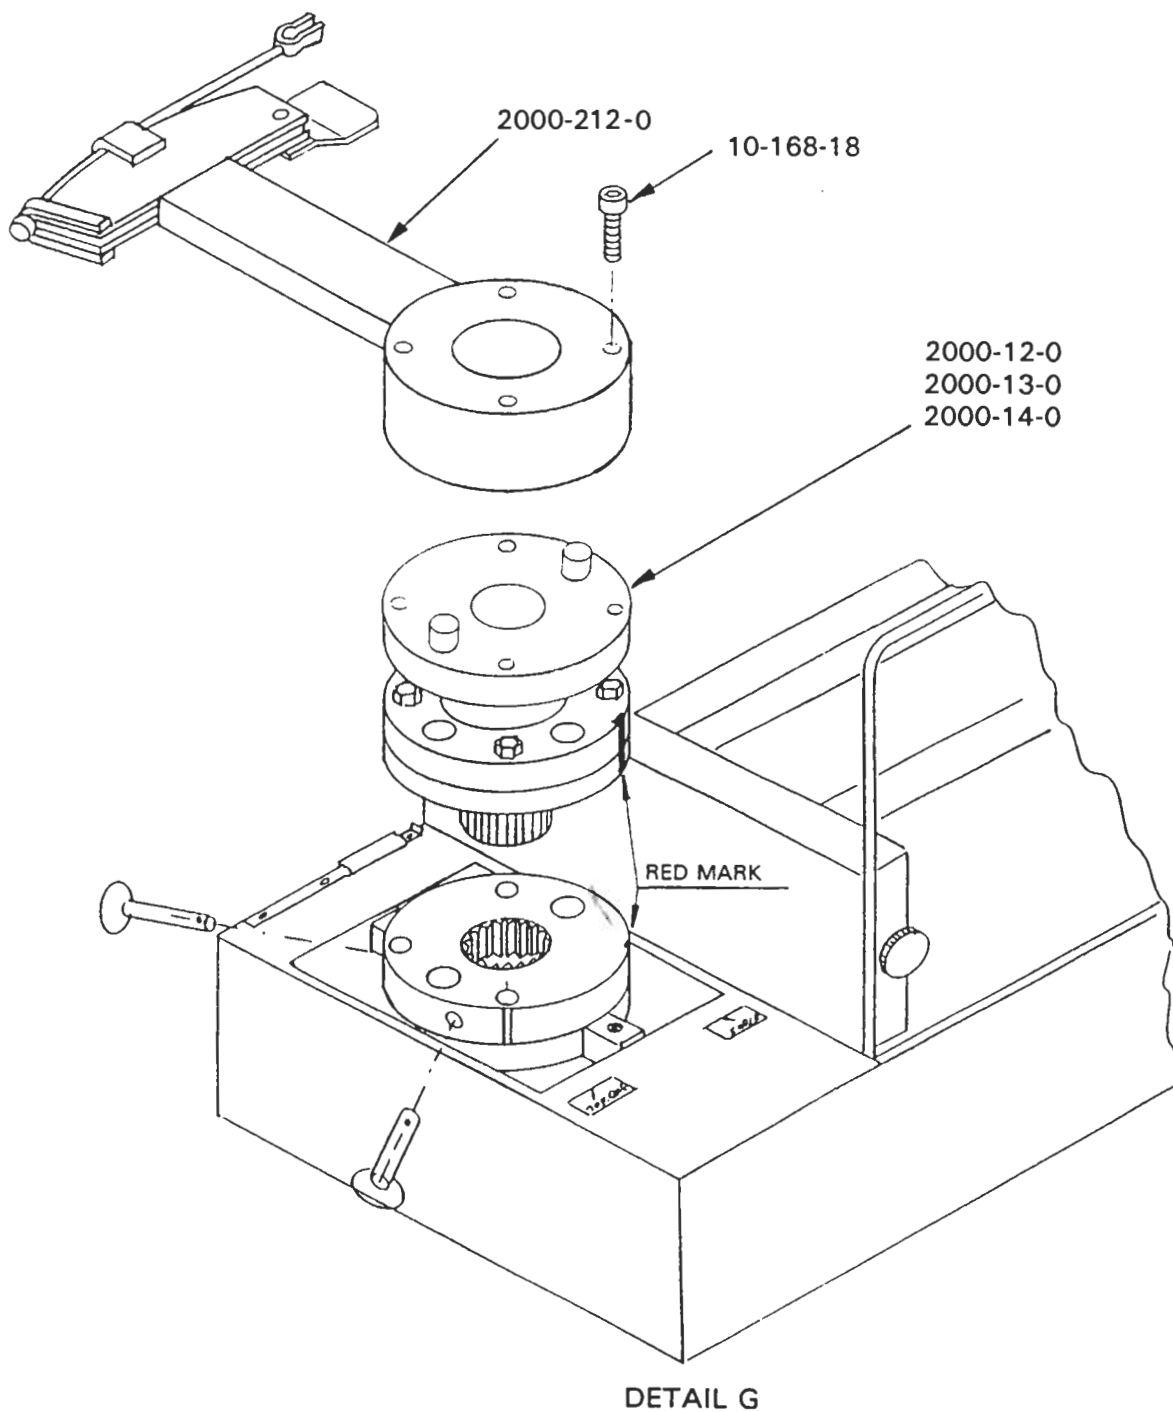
Cable Tensiometer Test Setup (Sheet 7)
